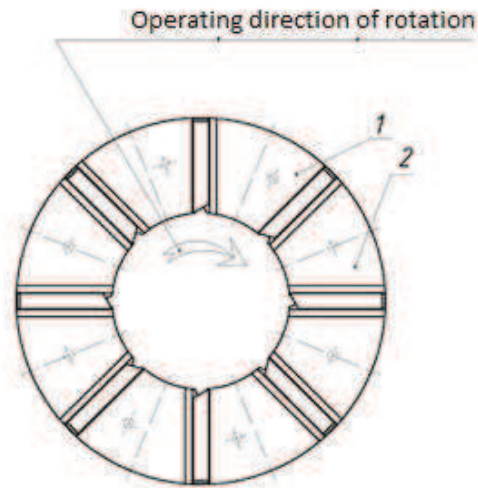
Thrust bearing with reversible and nonreversible pads: 1 – thrust nonreversible pad, 2 – thrust reversible pad.
